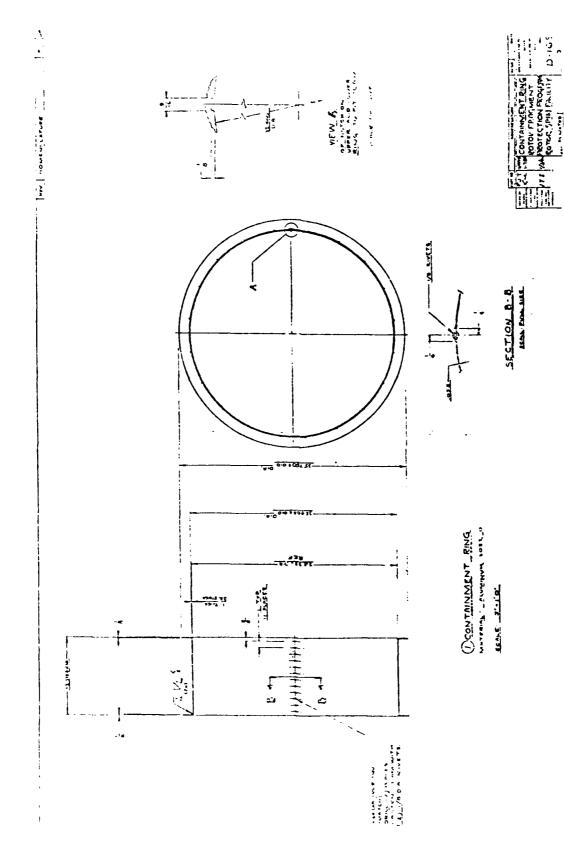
KEVLAR CONTAINMENT RING MANUFACTURING DRAWING (3 OF 3)
